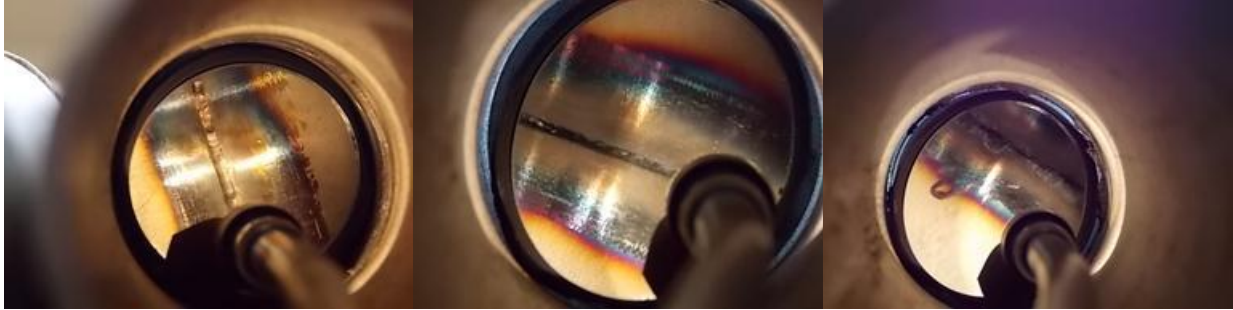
Examples of welds produced using 904L weld filler rods
